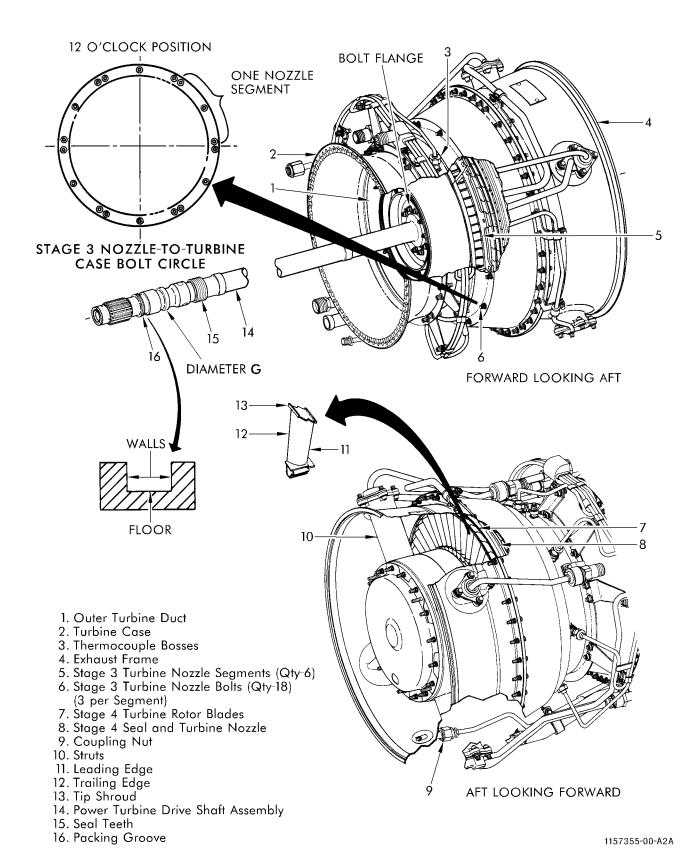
Power Turbine Module; Inspection (Sheet 1 of 2)
